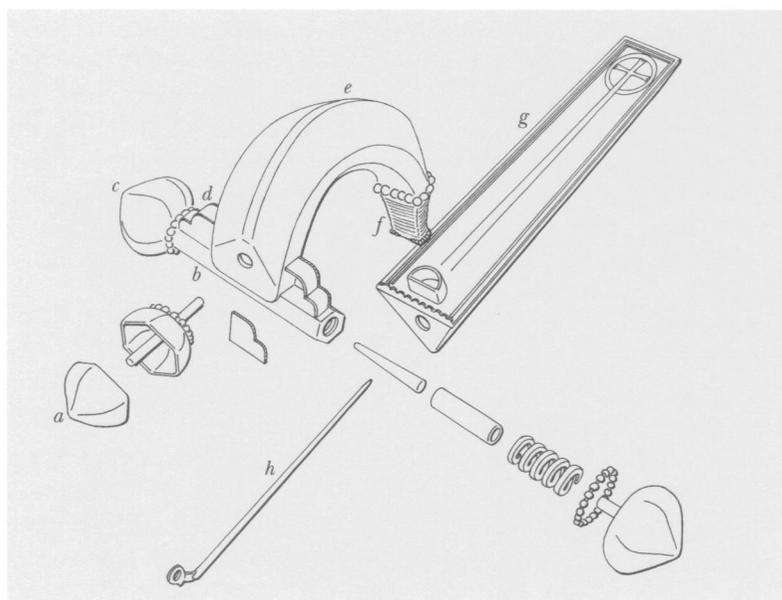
Drawing of the Metropolitan's gold fibula, with exploded views of the screw mechanism, head knob, and appliqués. Dimensions of the fibula: foot, L. 8.23 cm, W. 1.95 cm, D. 1.10 cm; crossbar, L. 5.53 cm (to the end of the knobs), W. 0.73 cm; knobs, H. 1.23 cm, W. 1.45 cm; screw mechanism (finial, threading, tip), L. 4.07 cm; pin, L. 9.83 cm, D. 0.19 cm (drawing: Daniel Kershaw). Parts of a fibula: (a) head knob or finial, (b) crossbar, (c) knob or finial, (d) appliqué, (e) bow, (f) filigree collar, (g) foot or catch, (h) pin
